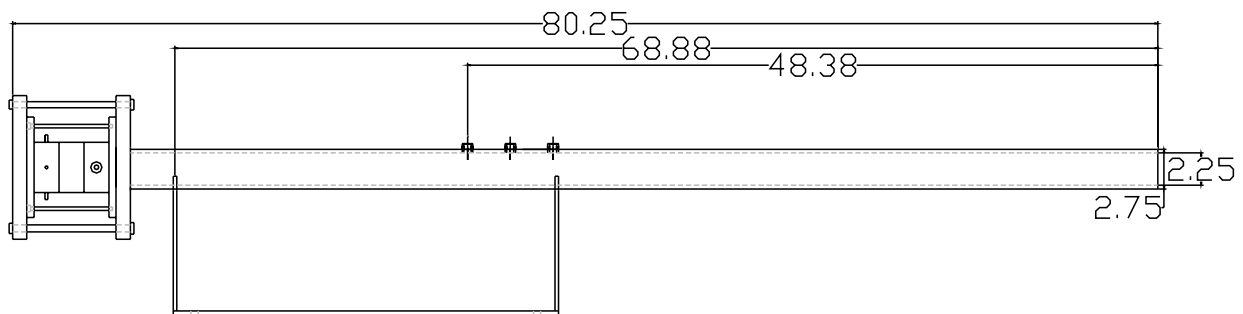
Detonation tube (2.25 in. diameter) for PDE-ejector experiments (#1 on assembly drawing).
